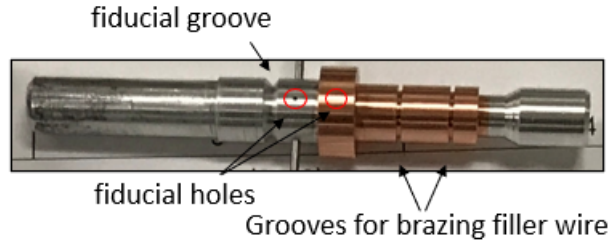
Aluminum mandrel with fiducial groove and fiducial holes, and a section with a negative profile of the internal TS geometry covered by electroformed copper. Copper is machined and has fiducial holes and grooves for brazing filler wire.
